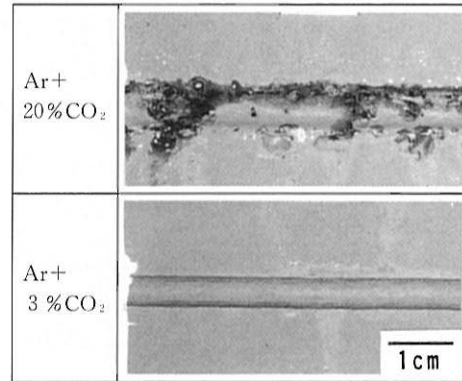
Appearance of welds after CCT 30 cycles
